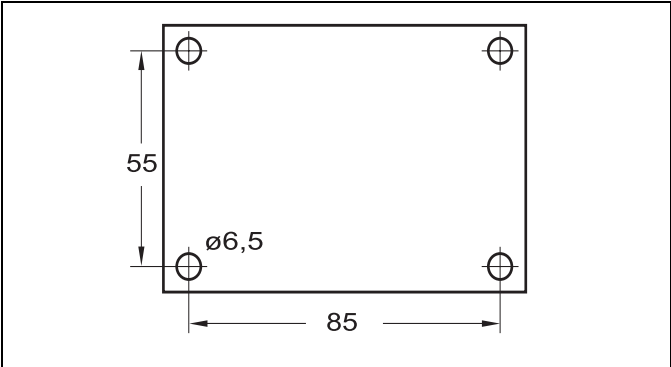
Hole pattern for the stand for the U 4855 circulating pump
